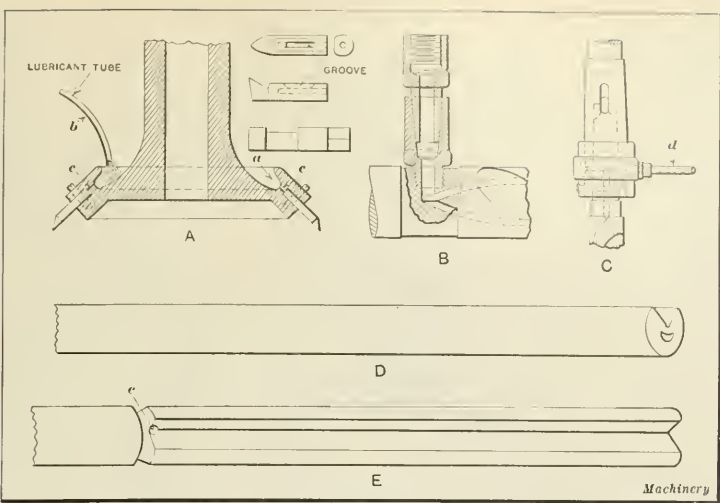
Methods of delivering Lubricant to Oil-tube Tools—Drill and Reamer for Deep Holes
